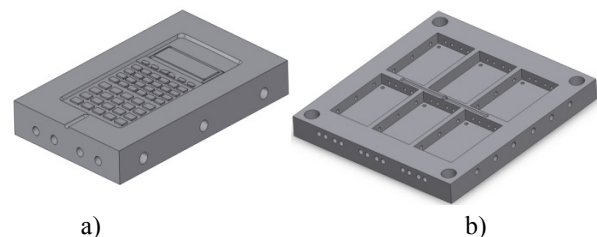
Workpieces a) plate nests with tools and b) upper mold plate
